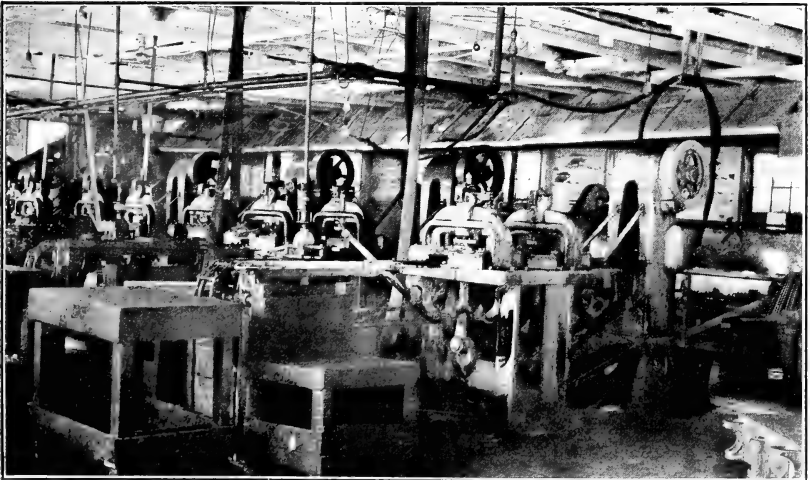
COMPRESSION TYPE SEALING MACHINES.
